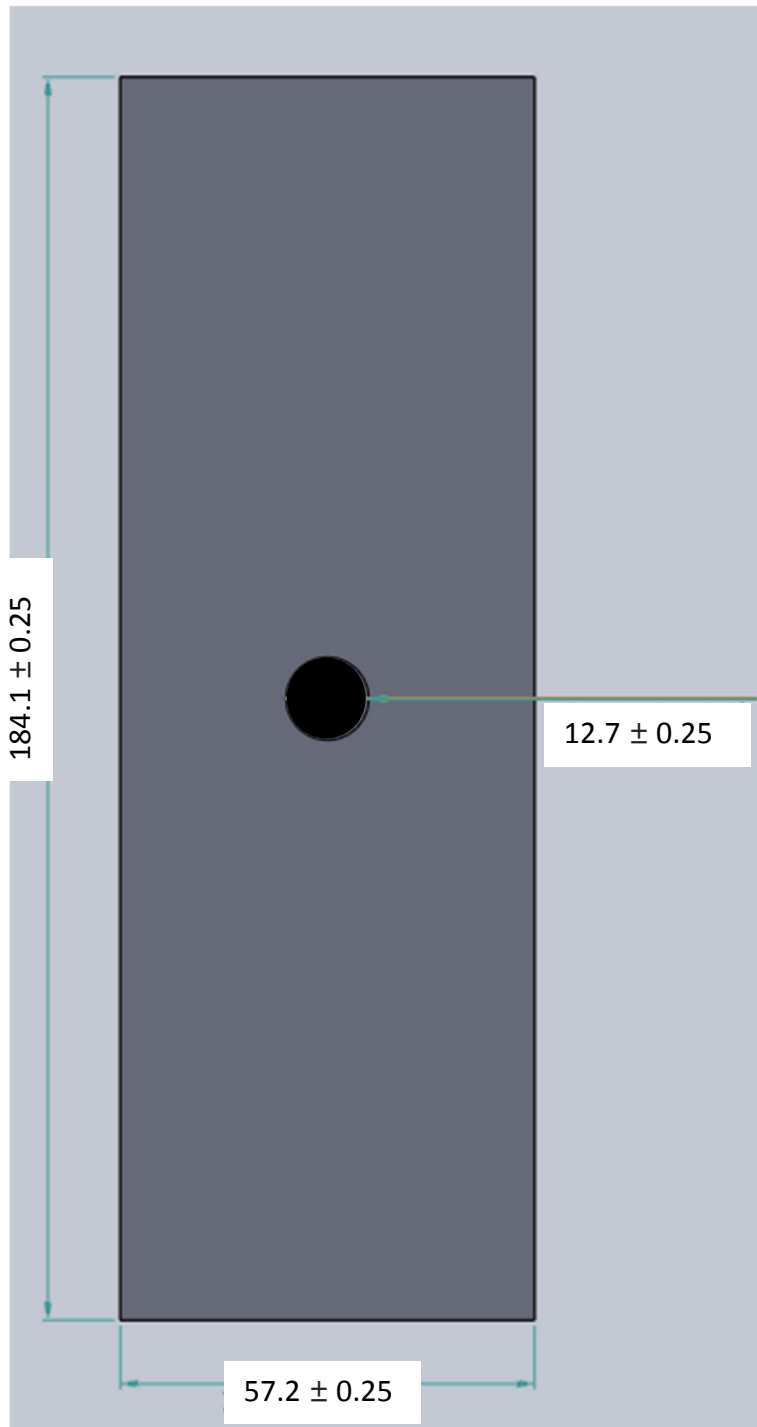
Top view of the new design beams' (NC beam) dimensions (mm).
